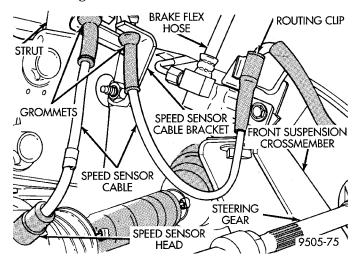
Front Wheel Speed Sensor Cable Routing INSTALL
